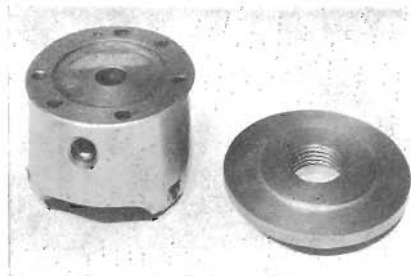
Rear View of Chuck showing Register and finish machined Backplate
